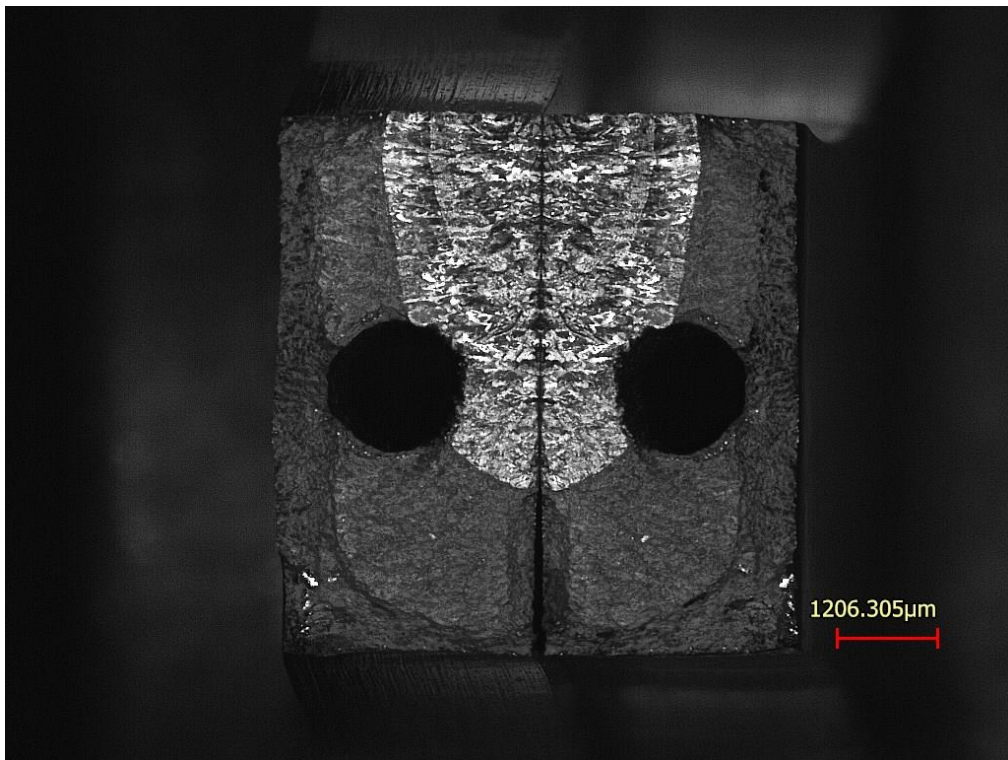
Specimen E3 fracture surface (6,000,000 cycles : 61.76 ksi / 425.8 MPa)
